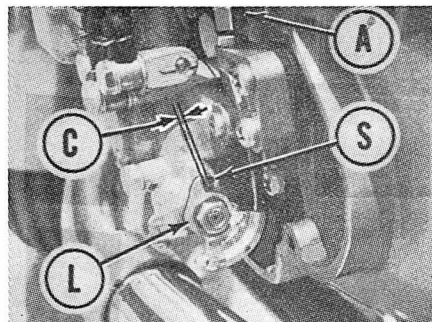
View of the oil injection pump. When idle speed is correctly set, clearance (C) should be slightly less than 0.02 inch.
